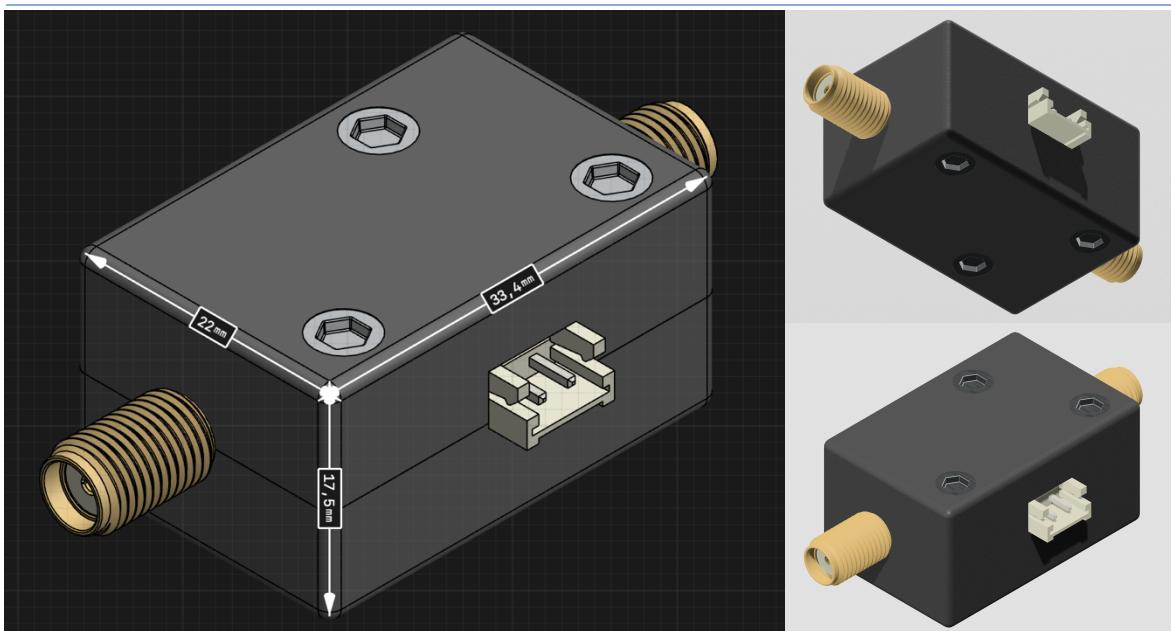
3D model of the device with enclosure measurements & isometric view of the assembled product [3]
